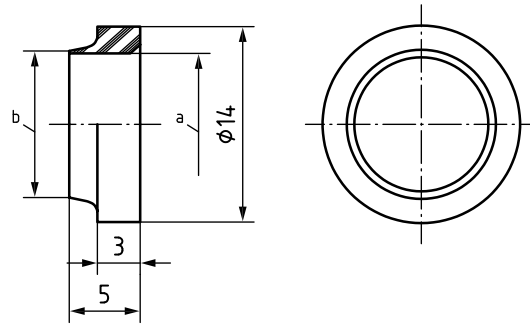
Alternative valve body schemeTable 1 — Valve body dimensions and threads
